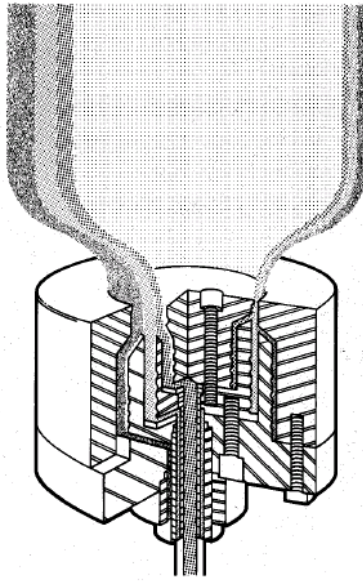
A three-layer multimanifold spiral mandrel blown film die.
